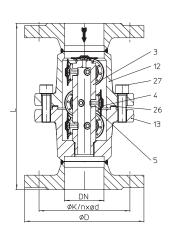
1....10K2 (DN40-50) with 10 capsules, with flanges -În-line design
